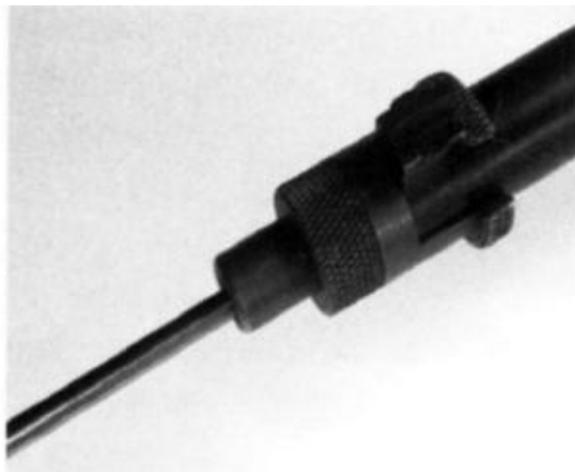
Muzzle rod guide in place with cleaning rod inserted.
